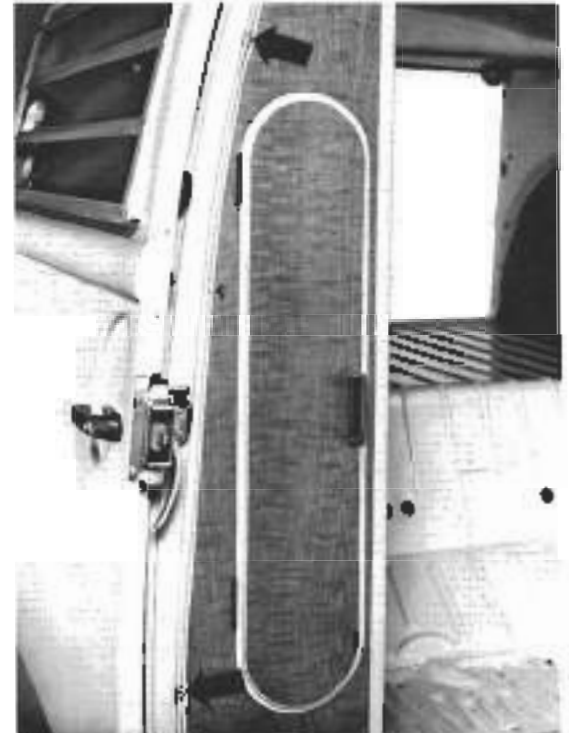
Screws (arrows) that hold the closet from brackets to the body. The sliding door must be opened for access to the screws.
